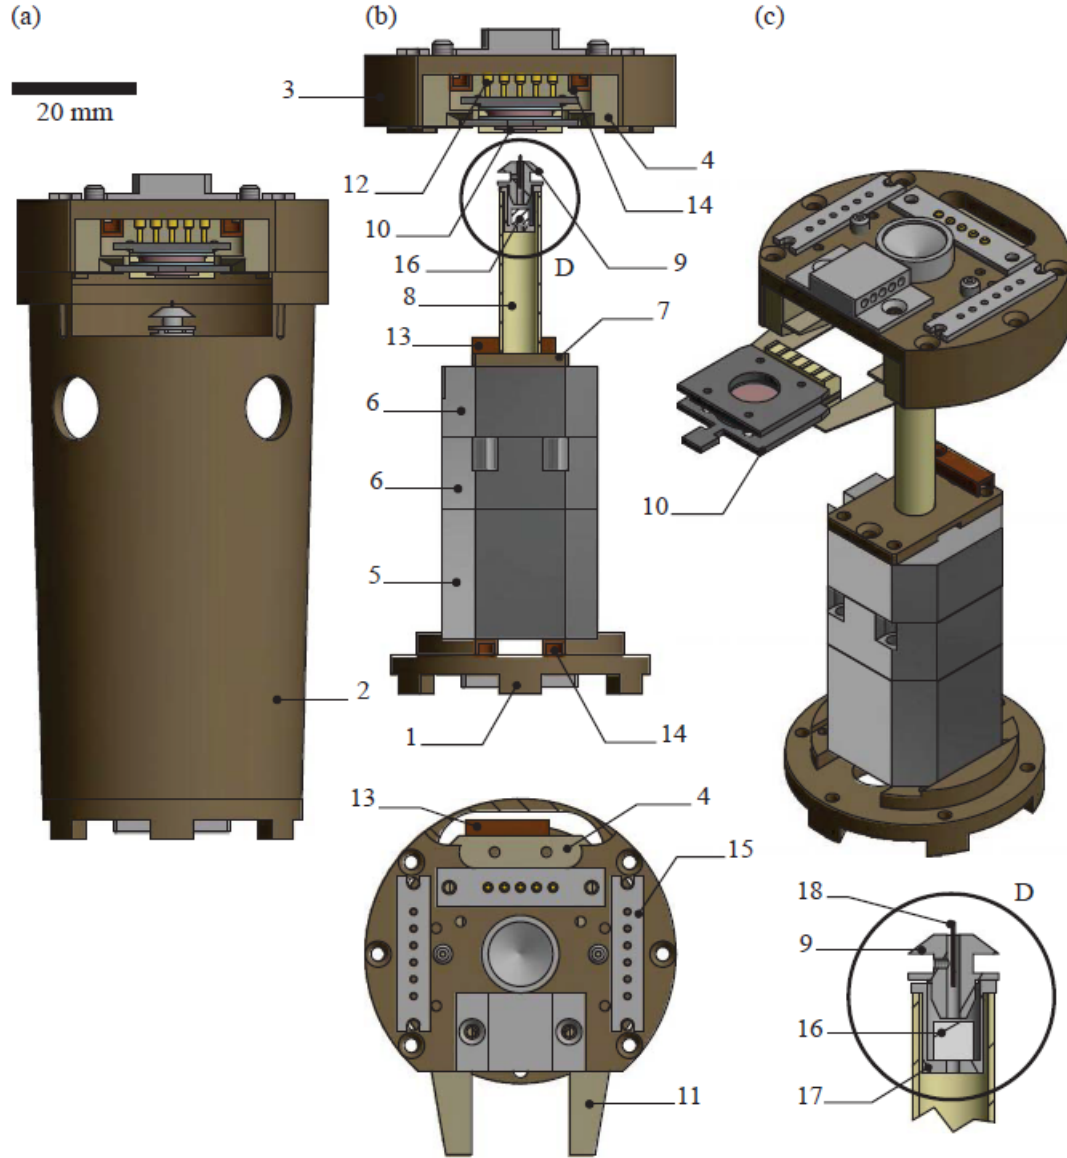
Model of the STM microscope head (a) with the cover body, (b) without cover body and top view, (c) isometric view with the sample holder. Individual parts: (1) bottom, (2) cover body,(3) top cap, (4) palette holder, (5) Z-coarse positioner ANPz101, (6) metal blocks, (7) Adapter, (8) tube scanner, (9) tip holder (10) plate with the sample, (11) , pressed sheet metal (12) connector UBEK 12001, (13) temperature sensor, (14) heater, (15) connector, (16) magnet, (17) cap for tip holder, (18) tip. Taken from [23].
